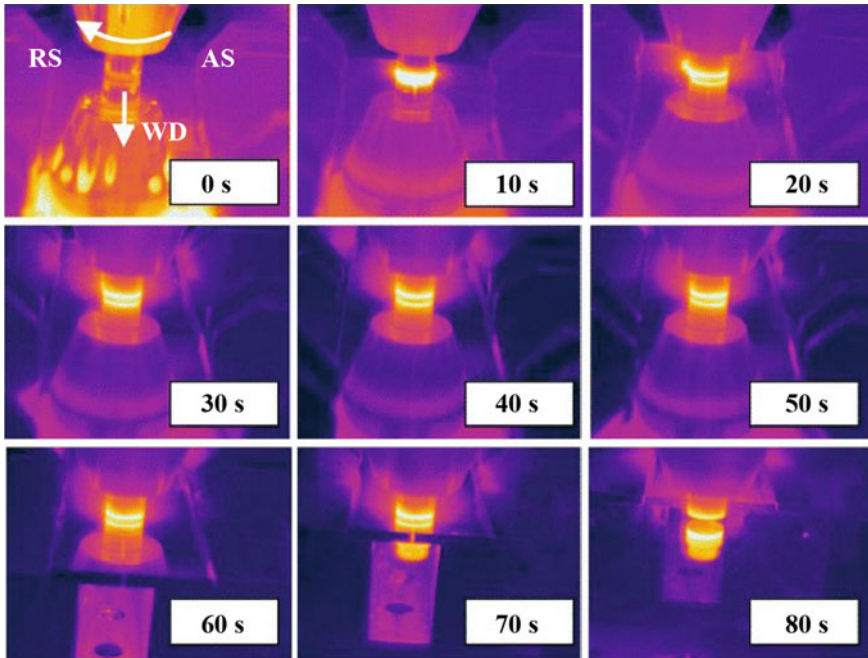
Thermal infrared images during a trial weld [1]. *Note* WD, Welding direction
